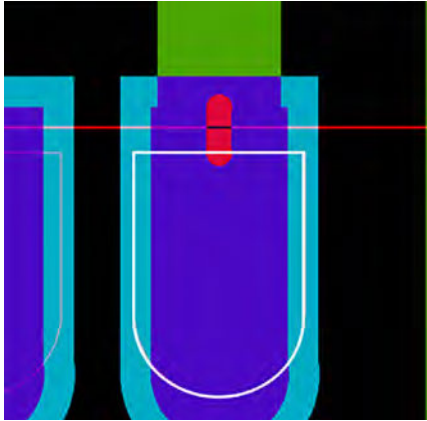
Insufficient heel distance and even the ratio of heel-to-toe distance can cause a weak solder joint. Conversely, too large of a pad for a device can cause a dry solder joint.
